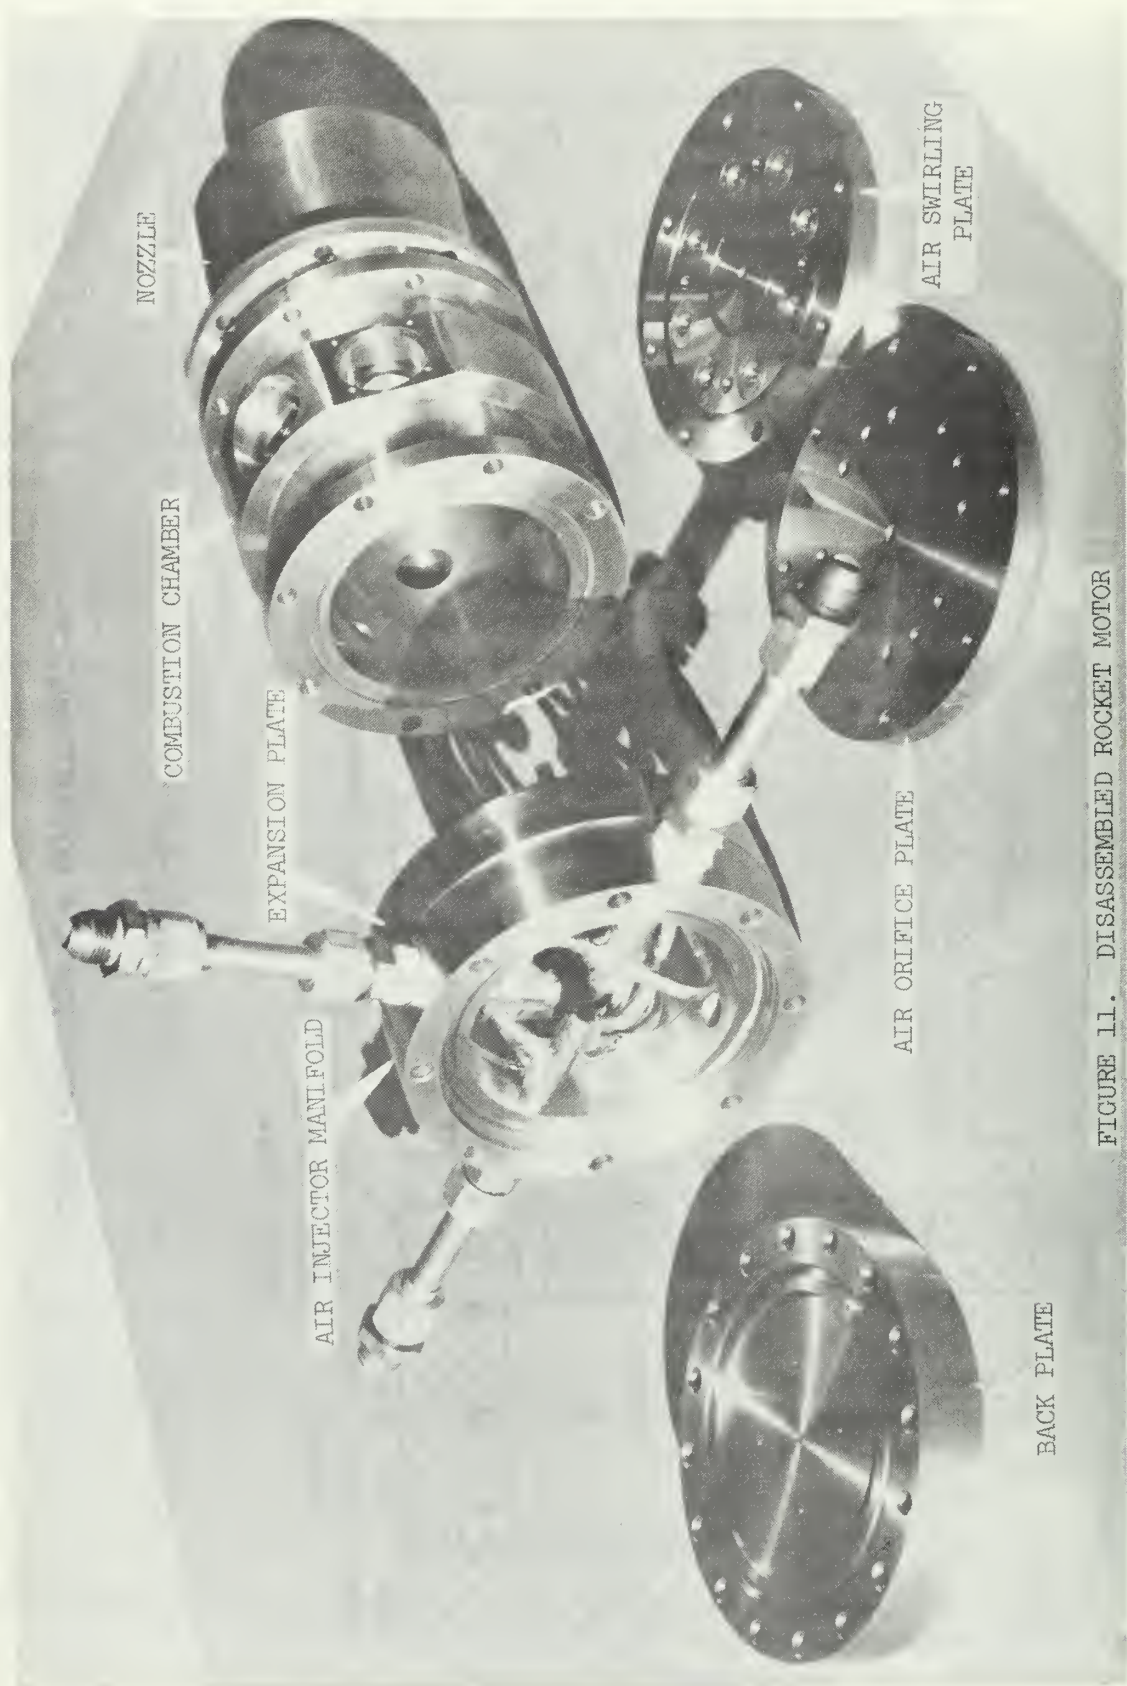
DISASSEMBLED ROCKET MOTOR
